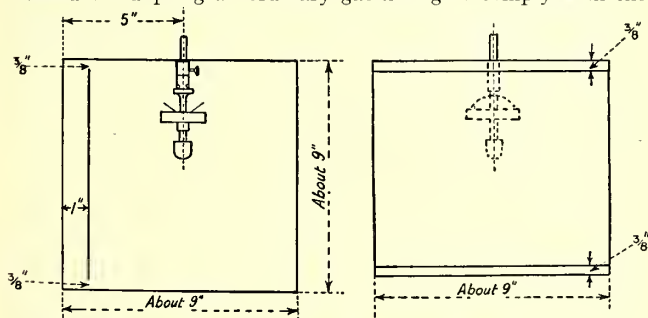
FITTING FOR GAS LAMP.—Metal box about 9 in. cube, open at front only. A separate sheet-metal front is set back 1 in. from front edge of box, with 3/8-in. gaps at bottom and top for air inlet and fume outlet. Left, side view; right, front view.
